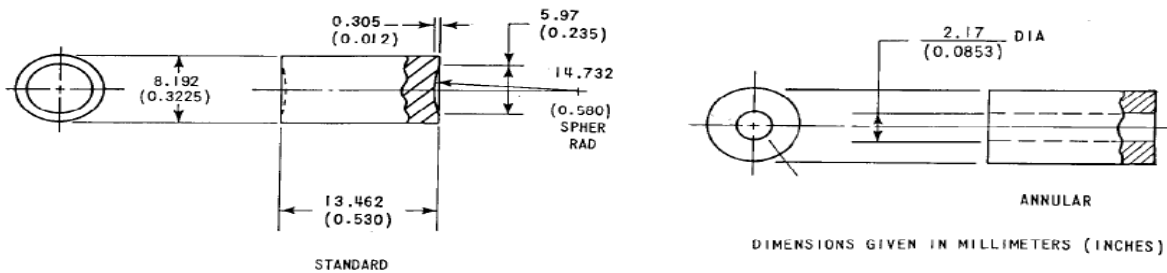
PWR Super-Ramp project: W test fuel, pellet design.
